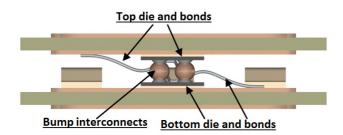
Cross-sectional view of the BDS assembly with details of the internal interconnections.
